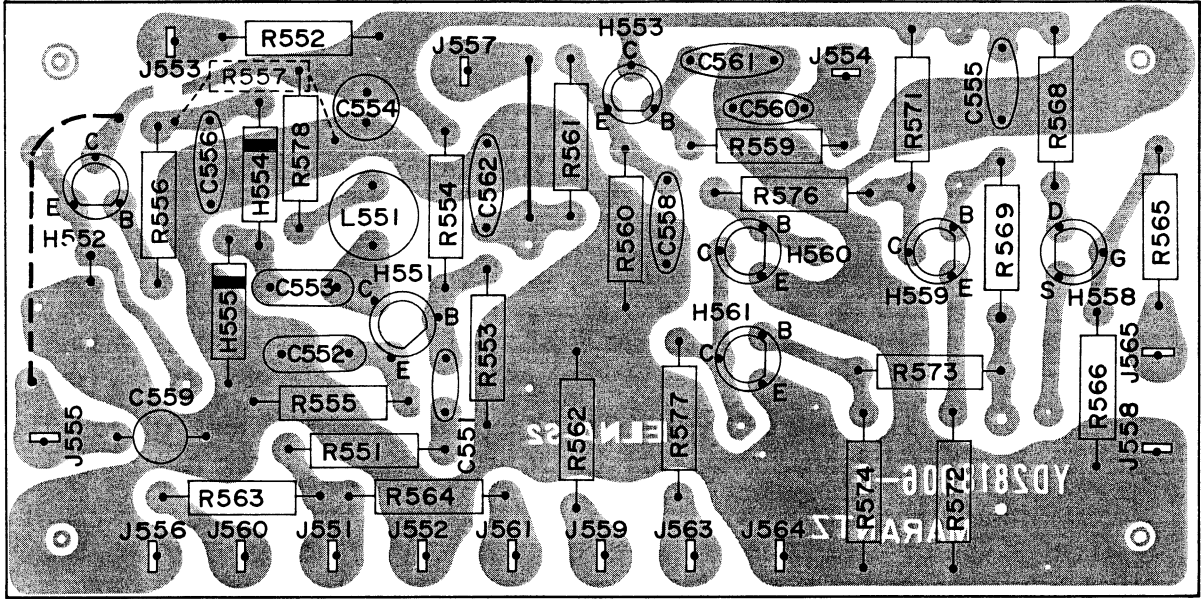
Muting Control Amplifier Assembly P550 Component Locations
